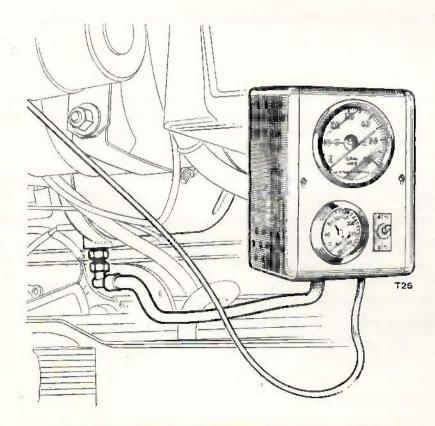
PRESSURE GAUGE CONNECTED TO THE FILTER HEAD
